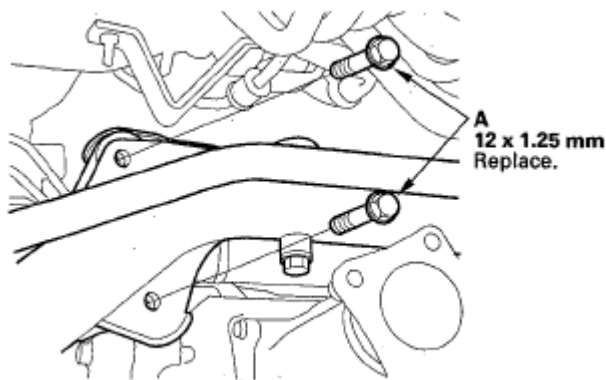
Identifying Mounting Bolts From Left Side Of Steering Gearbox
